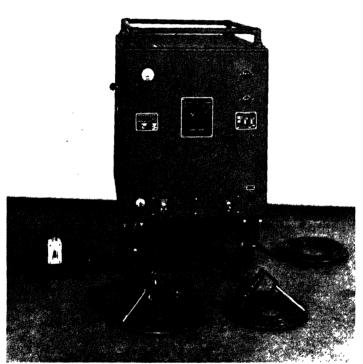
Electro-magnetic tester for welds (Magnaflux)
